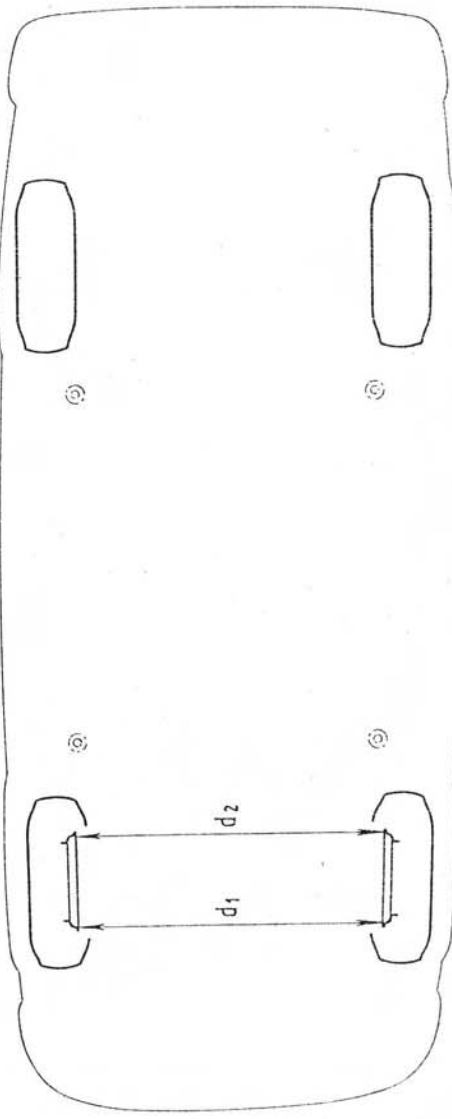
Diagram showing the position of spacing gauges A. 74144/1 for check of car load condition, for tightening front and rear suspension bushings, for check and adjustment of front end geometry.
